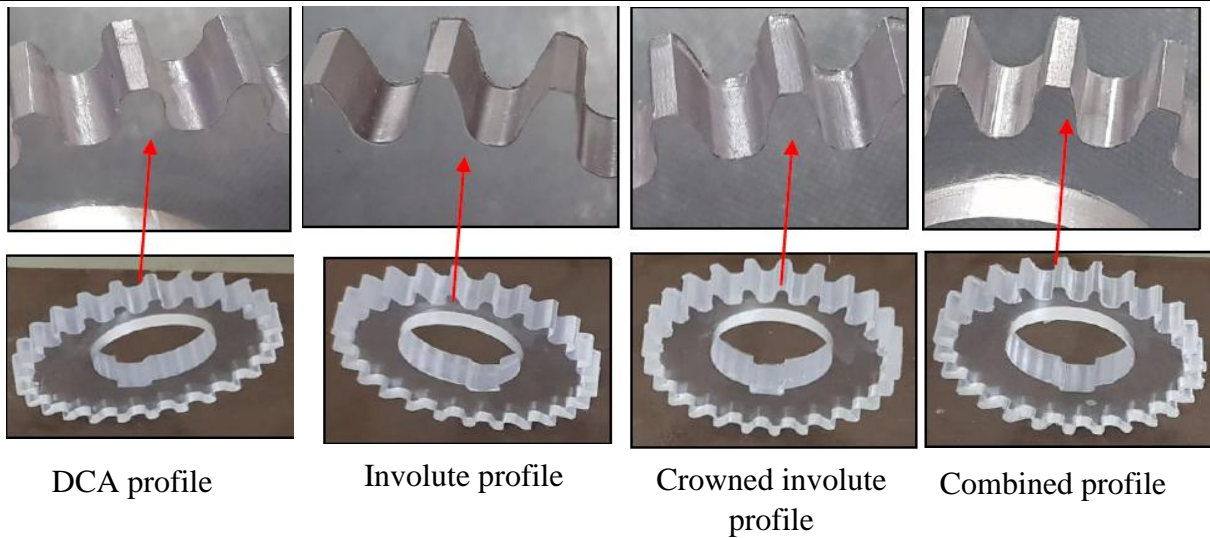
Elliptical Polycarbonate Gear Specimens Manufactured by CNC Machine.
